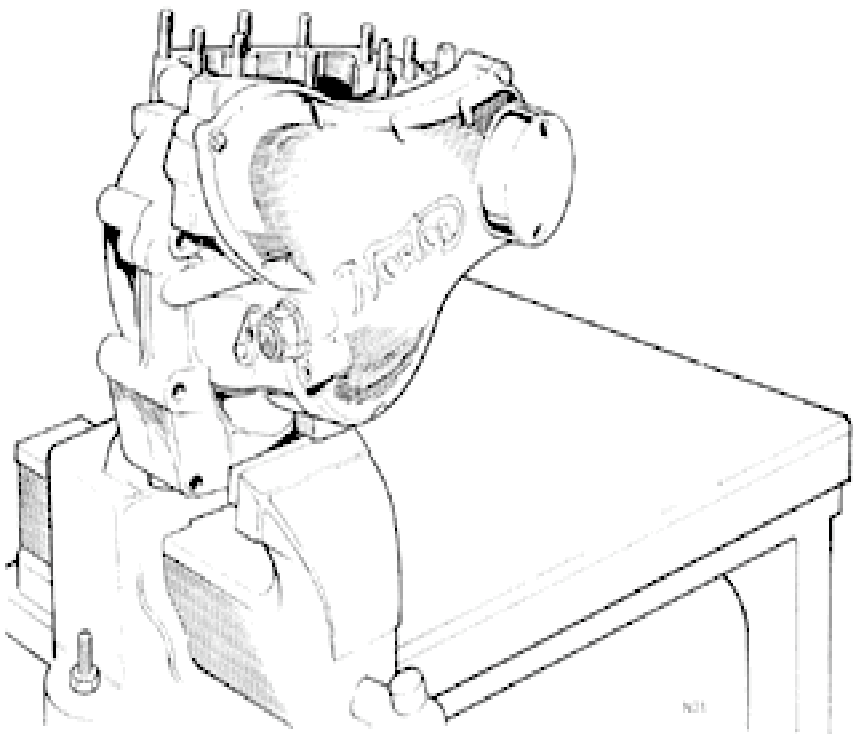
Removal of the crankcase assembly from mounting plates
